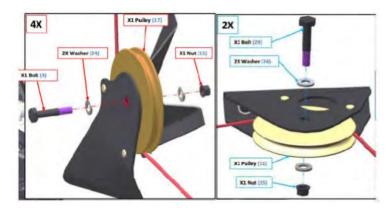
ROLL PULLEY EXPLODED VIEWS
